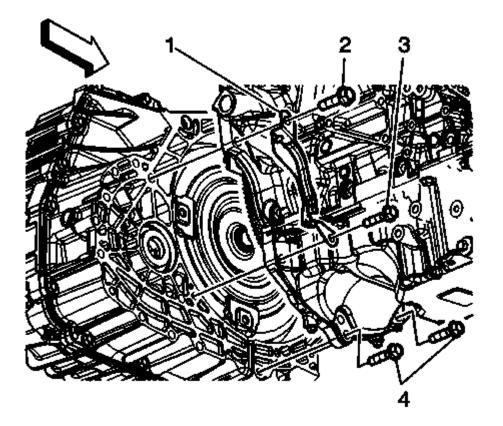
Identifying Upper Transmission And Engine Bolts Courtesy of GENERAL MOTORS COMPANY
